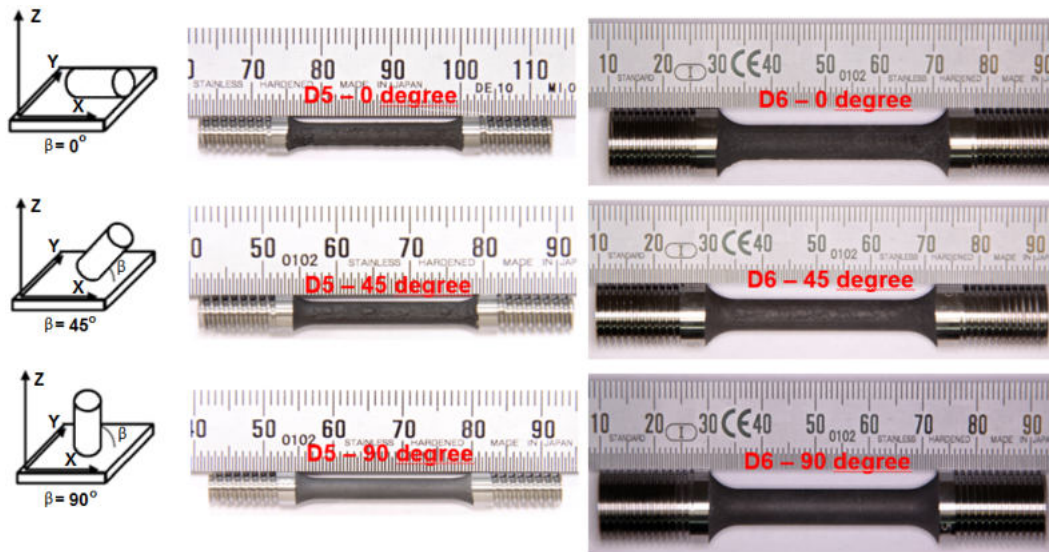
Tensile tests, samples D5 and D6 (printing direction 0°, 45° and 90°).
